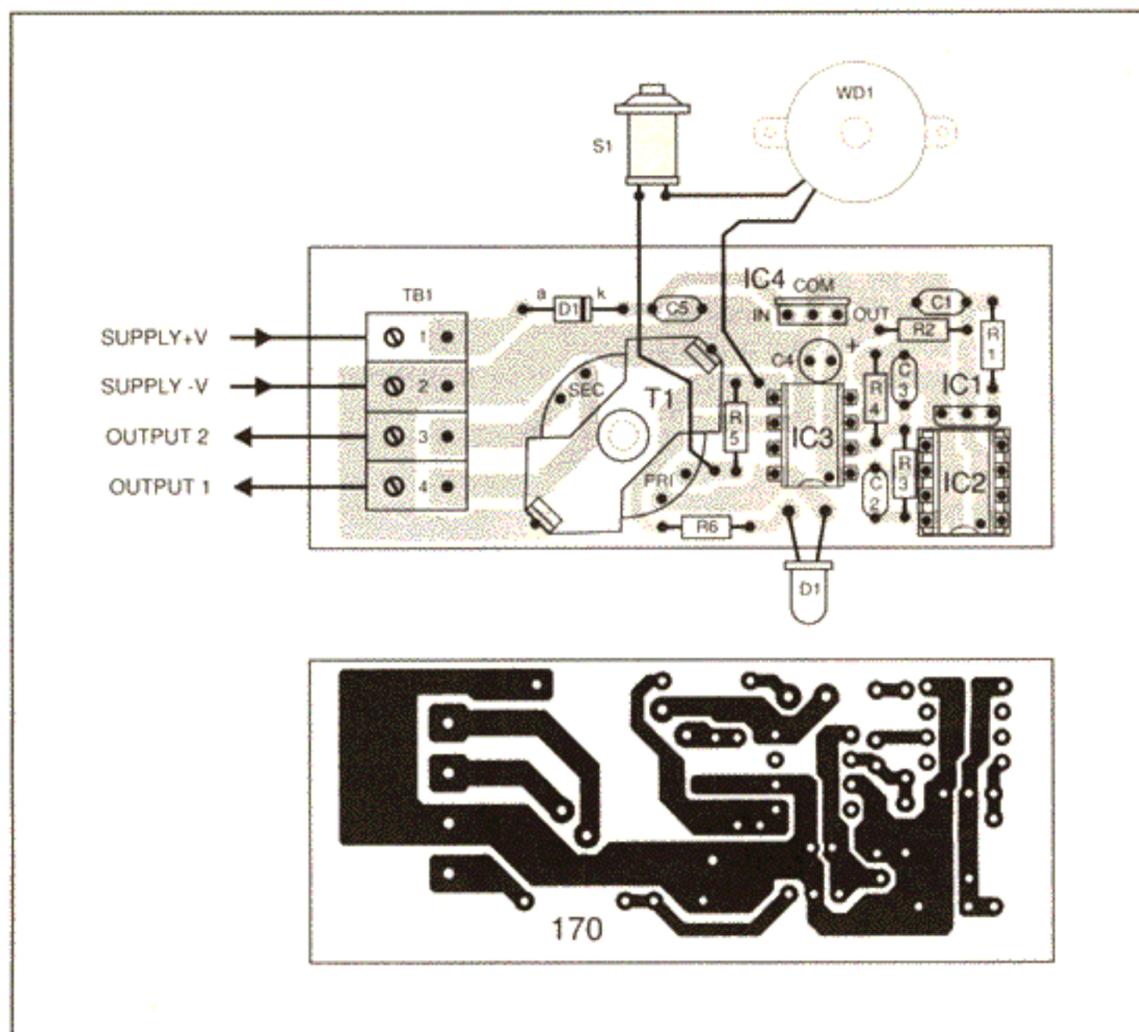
Printed circuit board component layout and full size copper foil master for the PIC Water Descaler. The piezo sounder and pushbutton switch are optional components.
